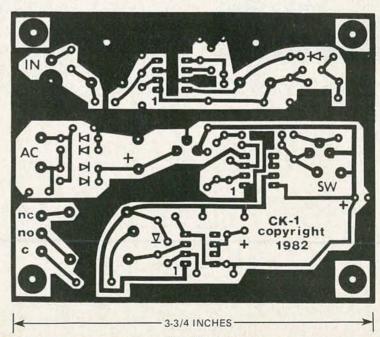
FULL-SIZE foil pattern for single-sided editor PC board.
